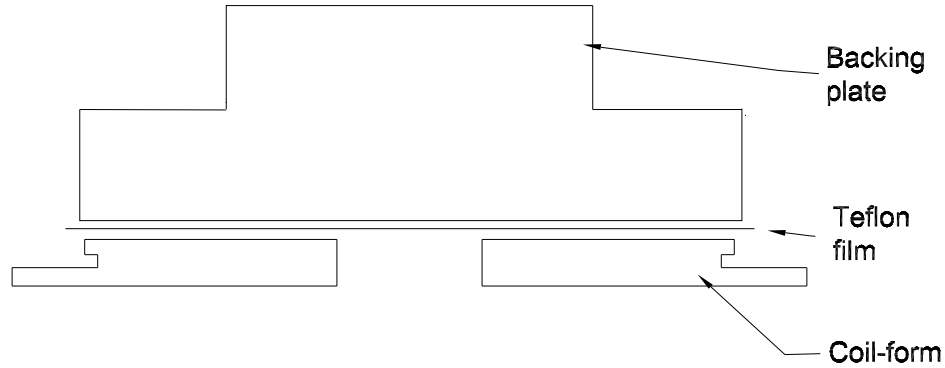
Coil winding diagram showing the coil-form, Teflon film, and backing plate.
